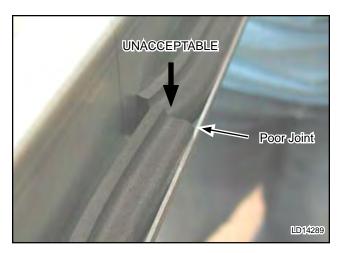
EXAMPLE OF AN UNACCEPTABLE JOINT - POOR JOINT
